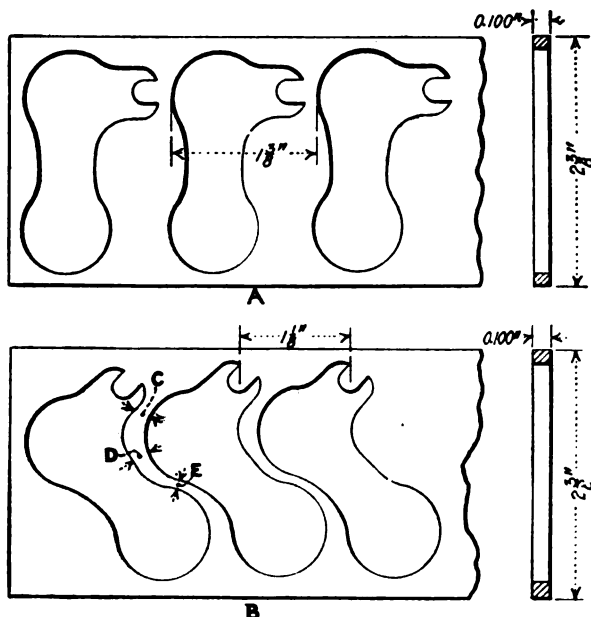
SINGLE-RUN LAYOUTS, SHOWING TWO METHODS
